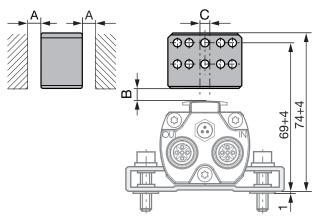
Dimensions and spacing with magnet BTL6-A-3800-2
